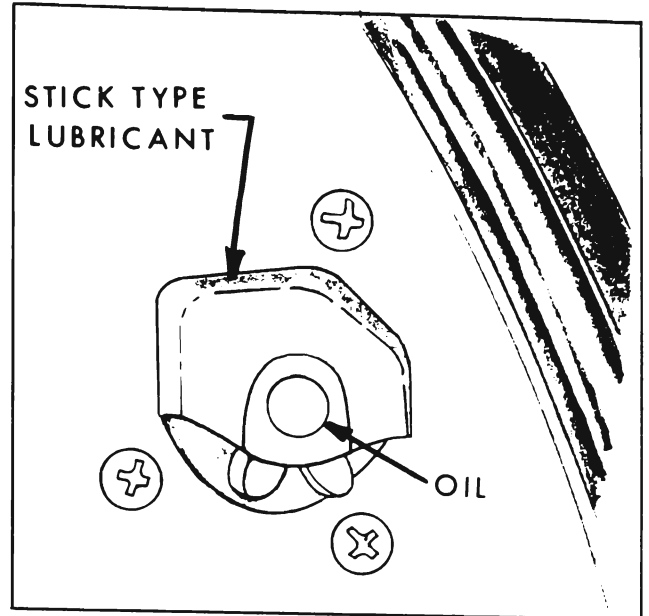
Lubrication of Door Lock Bolt and Housing
